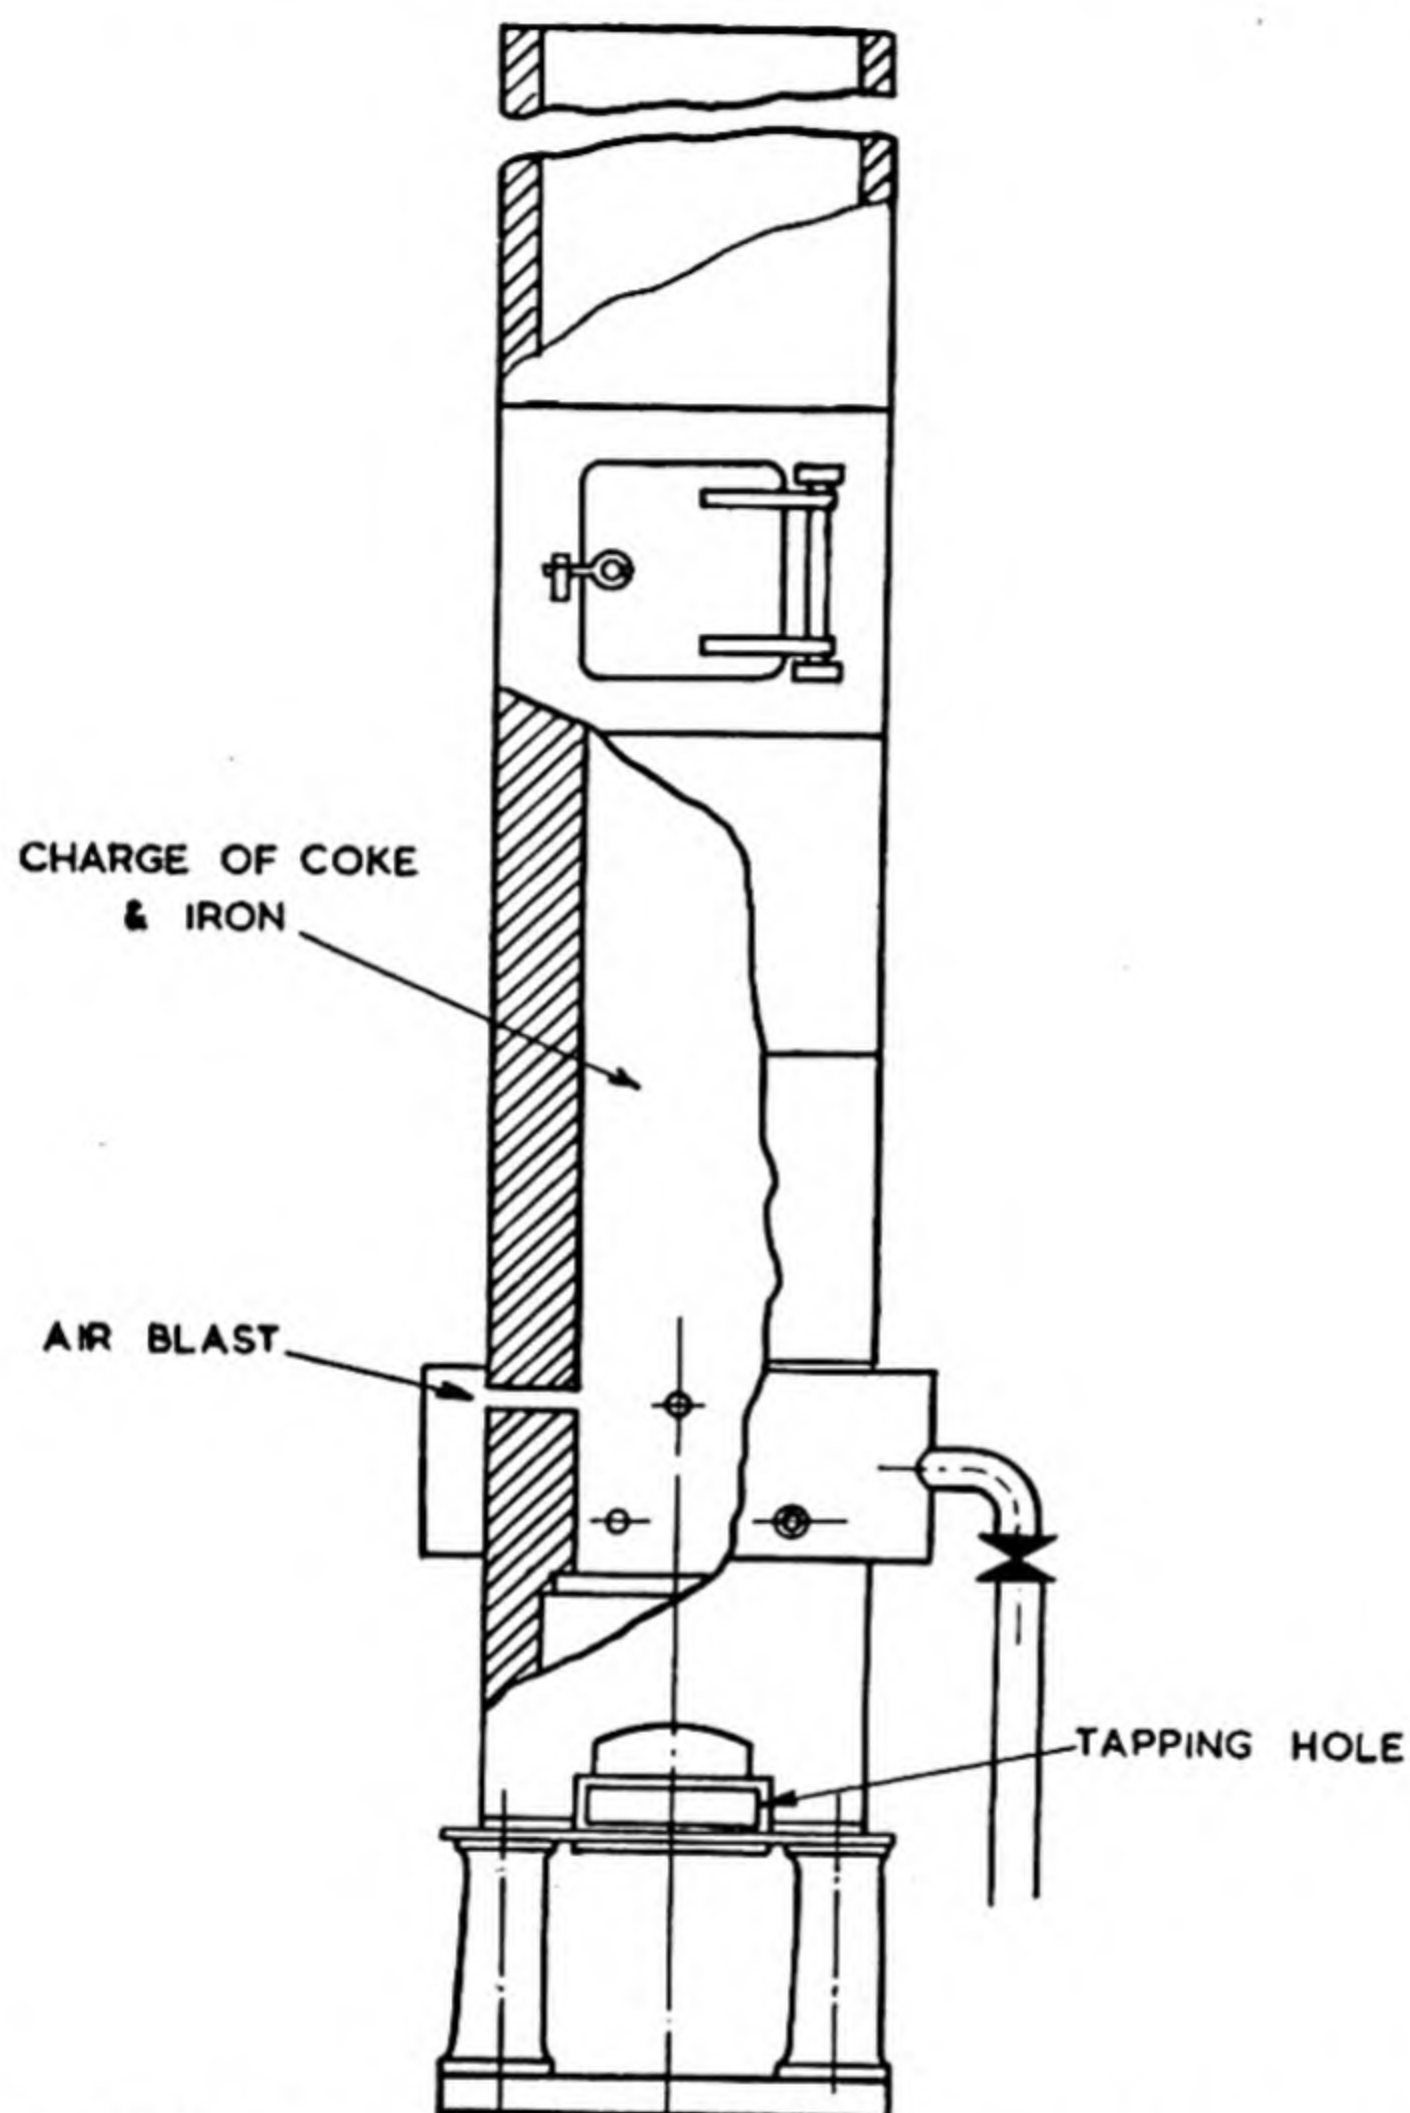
3. Cupola Furnace for Iron Casting Manufacture.
